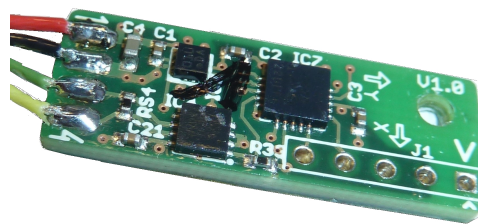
BMA280 accelerometer board with controller and RS-485 Bus driver.
